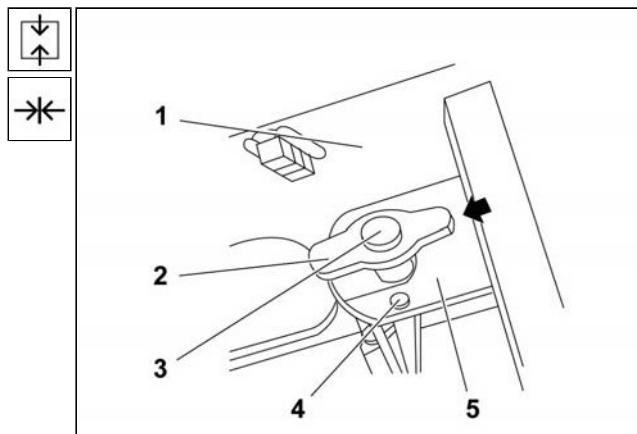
Mechanical batteries circuit breaker - location, installation
